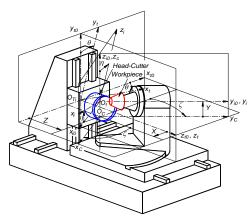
Machine-tool setting for pinion tooth-surface finishing on CNC gnerator
